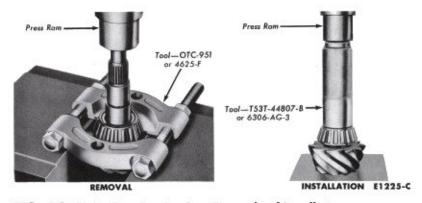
Pinion Rear Bearing Cone Removal and Installation
